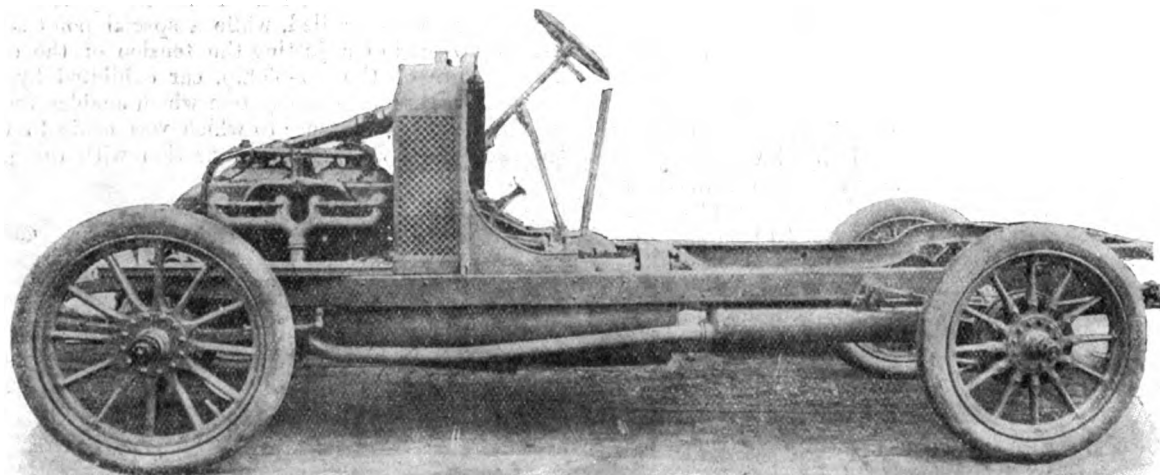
Chassis of Renault 35-45 h.p. Car.
